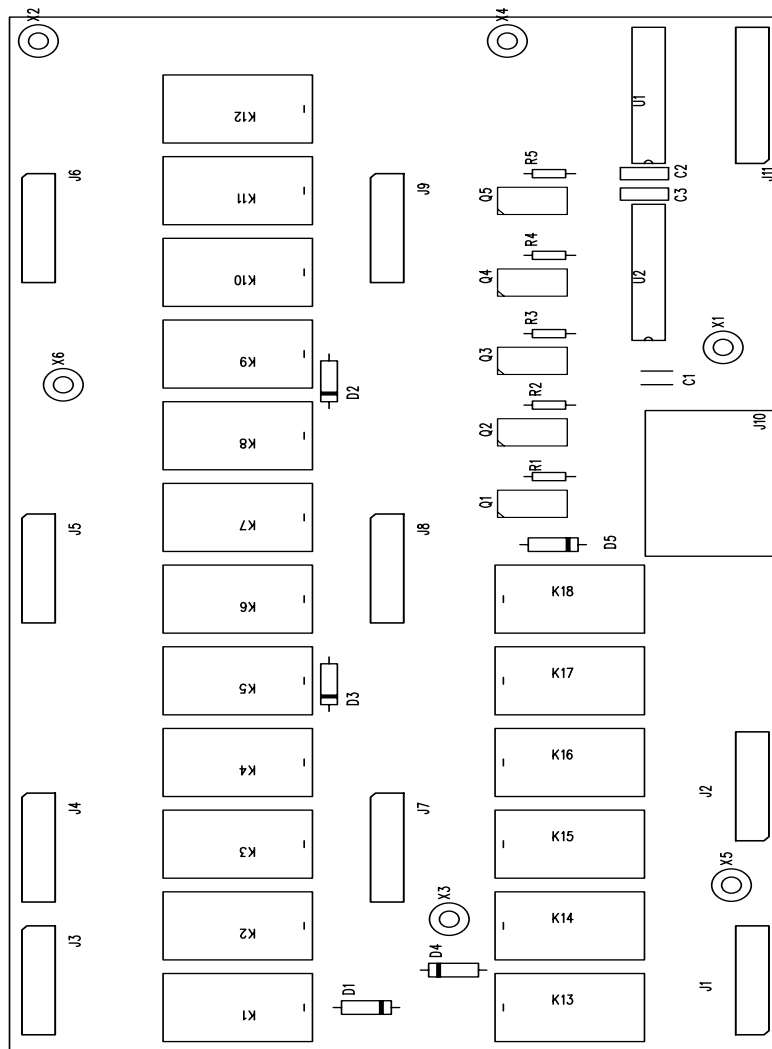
Audio bus switcher/combiner PCB, silkscreen/assembly drawing.
